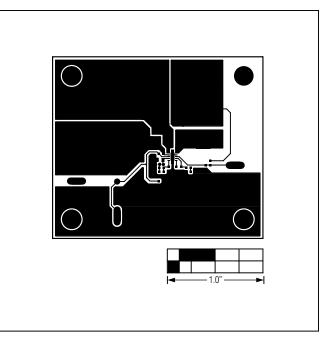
MAX17502G EV Kit PCB Layout—Component Side
